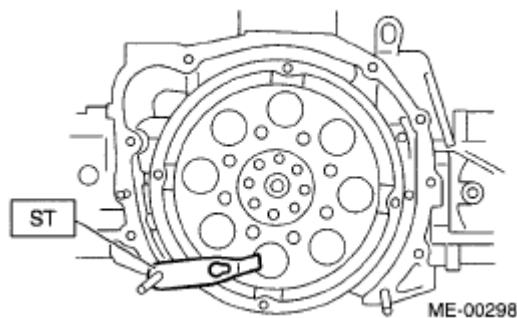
Locking Crankshaft Using Crankshaft Stopper ST (498497100)- AT Model
